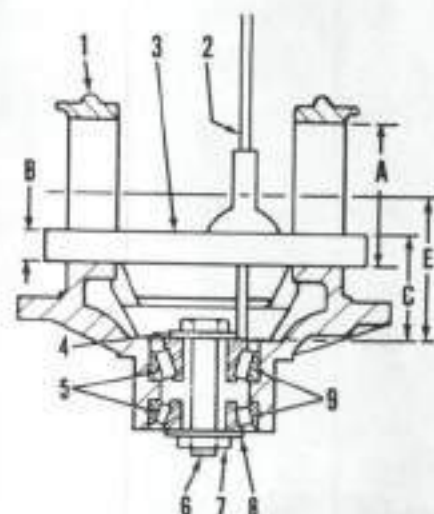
Diagram showing method of securing pinion bearings in support housing to allow depth gage measurement to be taken.
